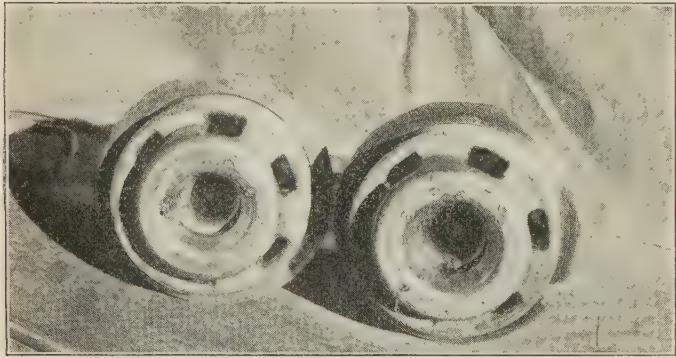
CONTACTS FROM 136B BREAKER AFTER TEST NO. 31
